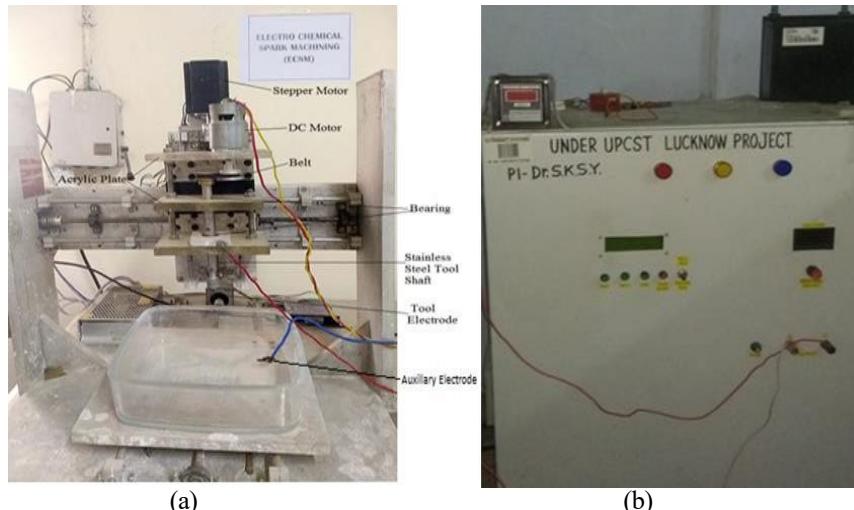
Experimental Setup: (a) ECSM machining setup (b) Power Supply Unit
